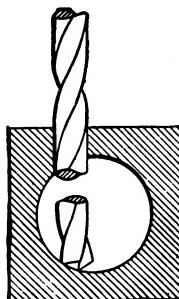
How a drill would break if the hole shown in Fig. 142 was drilled in the usual manner
